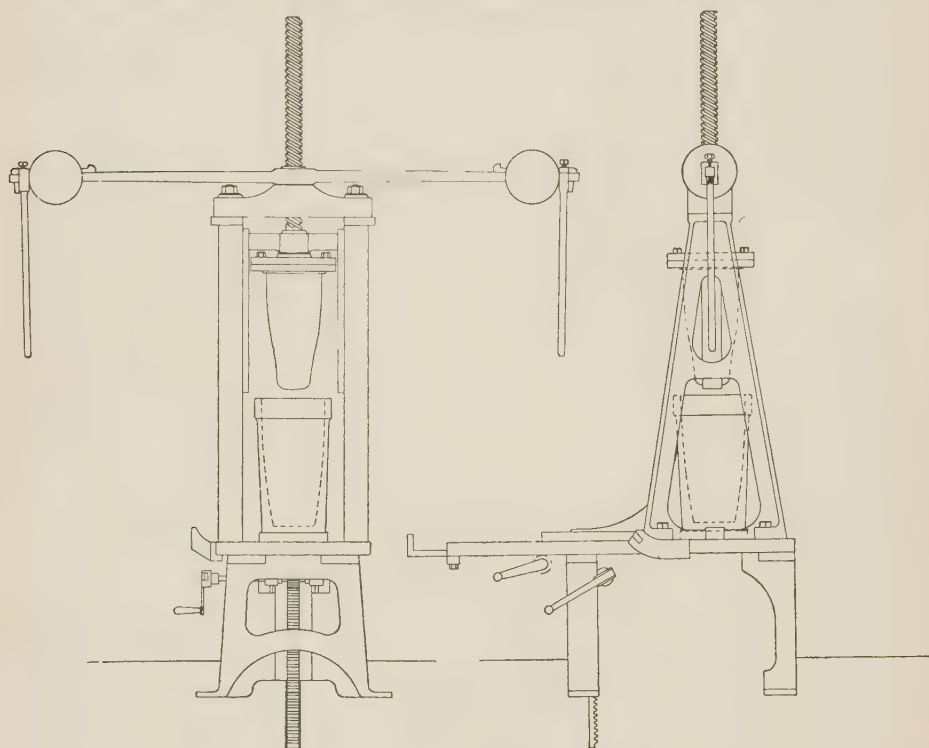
Machine for making Crucibles. (Crowley's design.)
